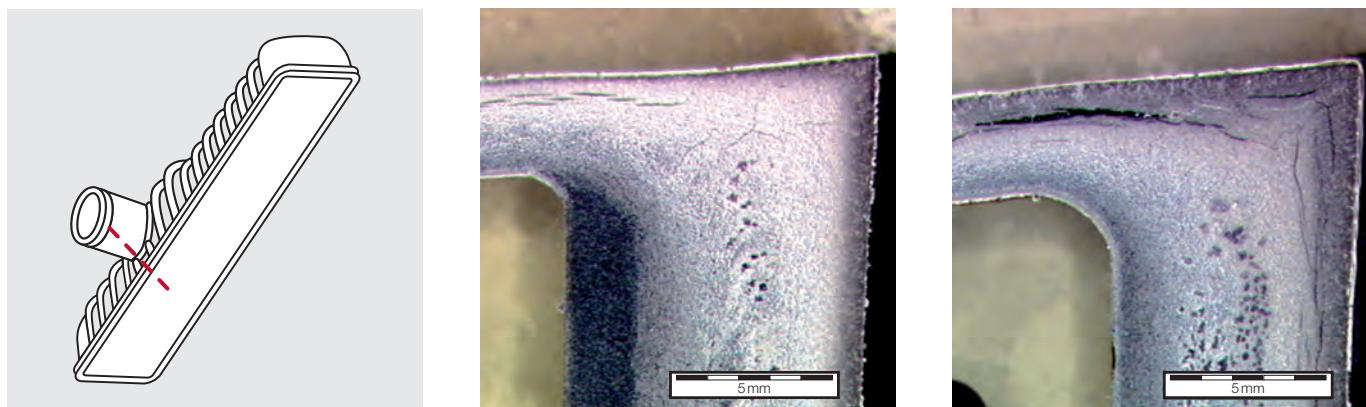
Section through the connection piece of a radiator end cap following a service-life test; middle: Ultramid® A3WG6 HRX; right: standard PA66 GF30 HR, clearly visible material damage in the form of cracks which have not led to component failure
